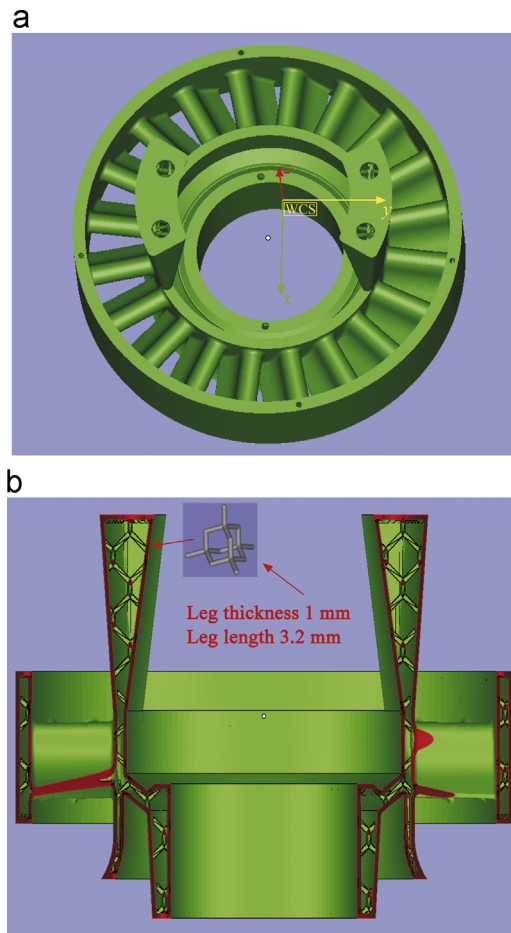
CAD model of turbine stator. (a) CAD model and (b) internal web structure.
